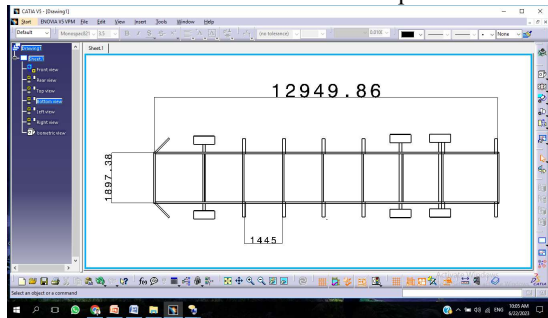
Top View Draft for 3D Model of Truck Chassis
